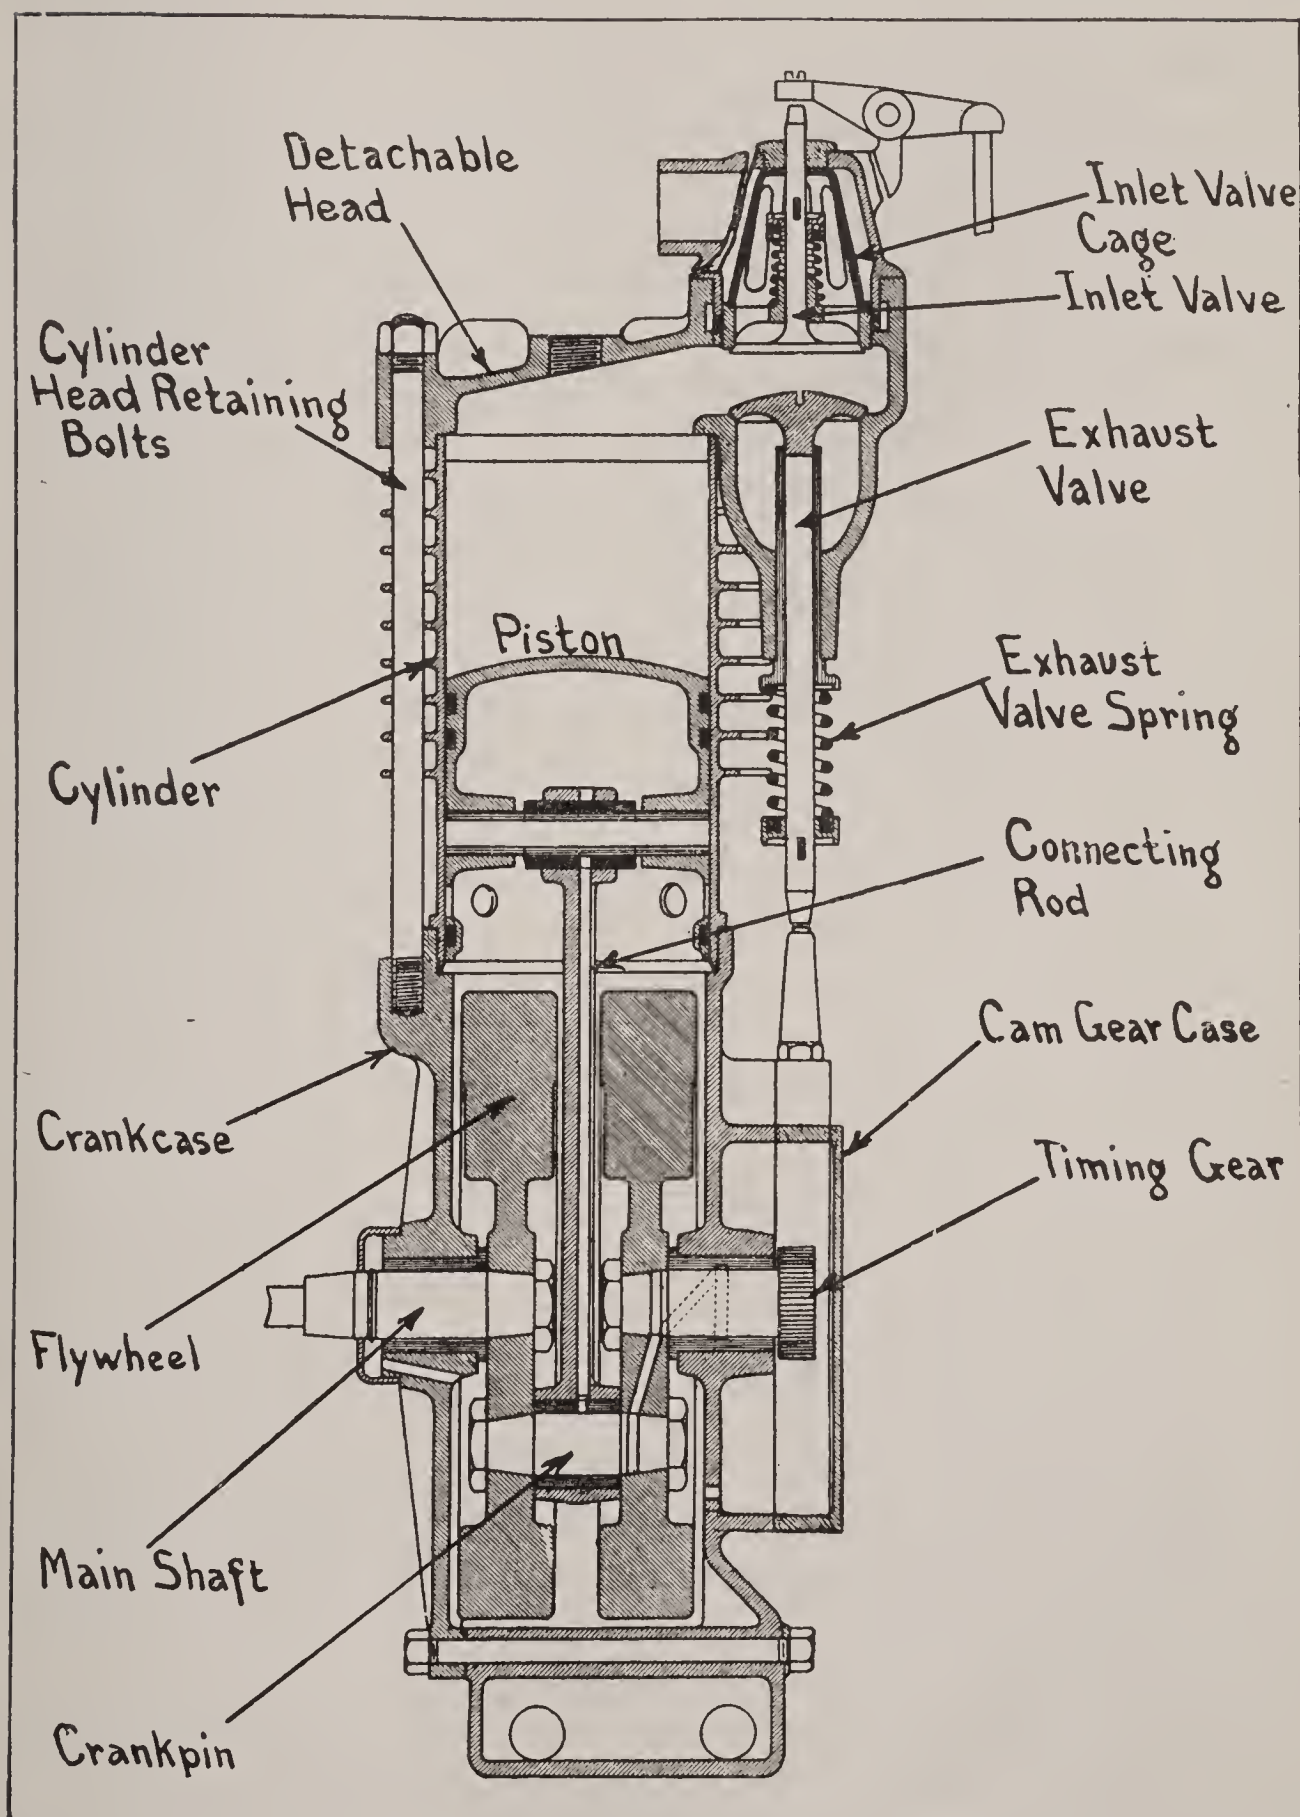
Sectional View of Single Cylinder Motor of English Design Using Detachable Cylinder Head.
